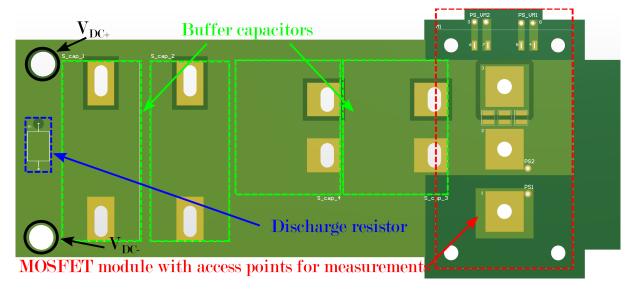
MOSFET module interface PCB design (3D view from Altium Designer)
